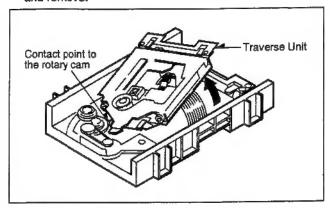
Contact Point of the Traverse Unit and the Rotary Cam
